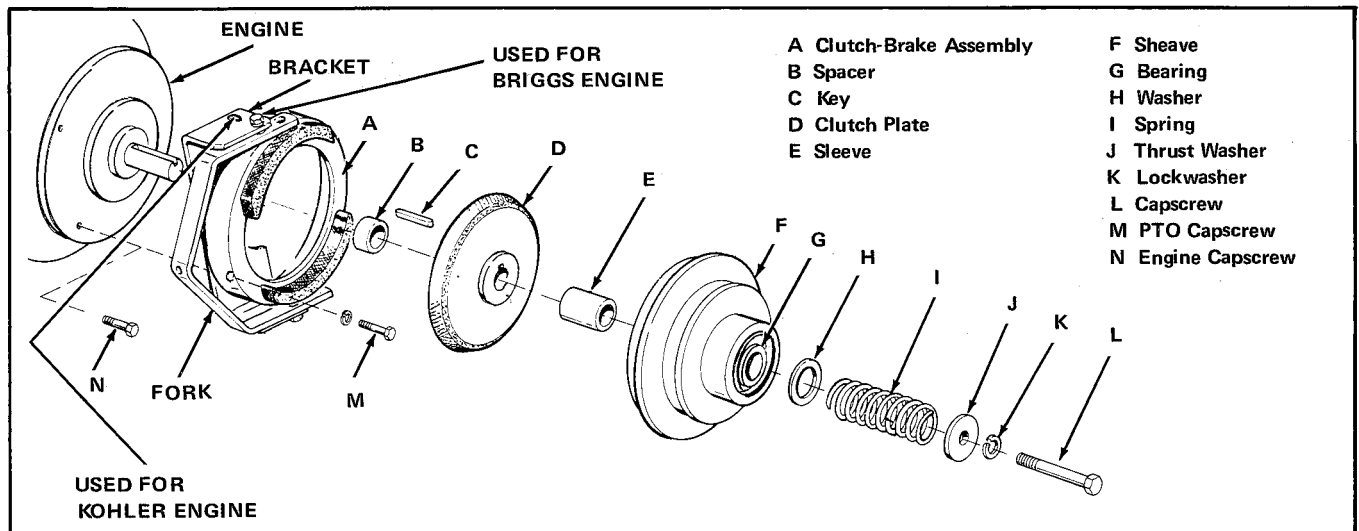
Install Clutch-Brake on Tractor Engine Shaft
